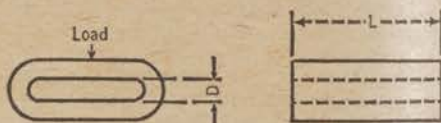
Deformed Specimen of Vacuum Brake Hose.
